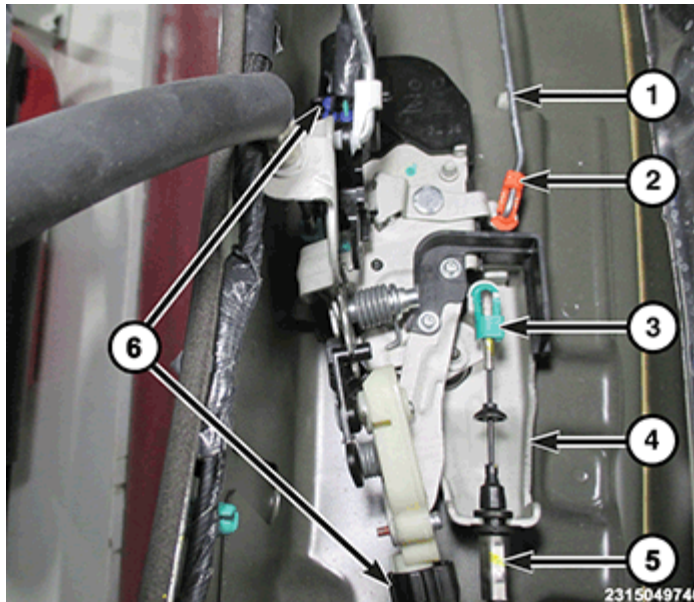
Door Lock Cylinder Link, Clips), Exterior Handle Release Cable & Wire Harness Connectors
